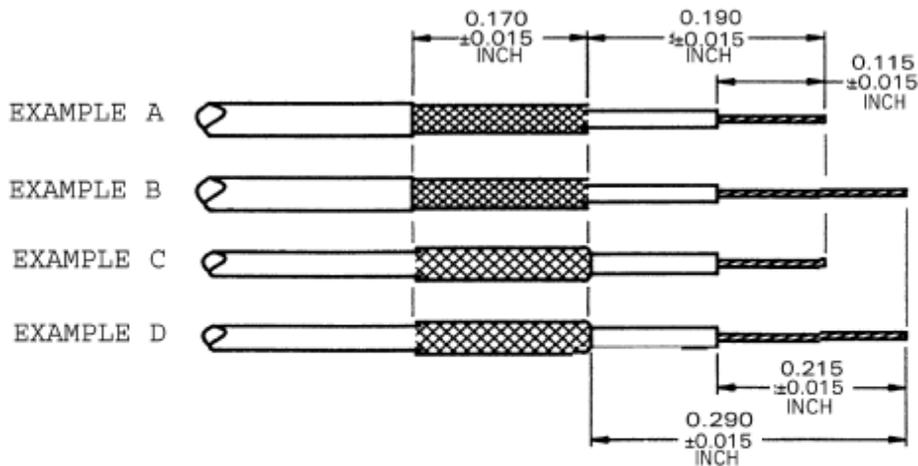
Coaxial Cable Stripping Dimensions (Refer to Table 5-1)
